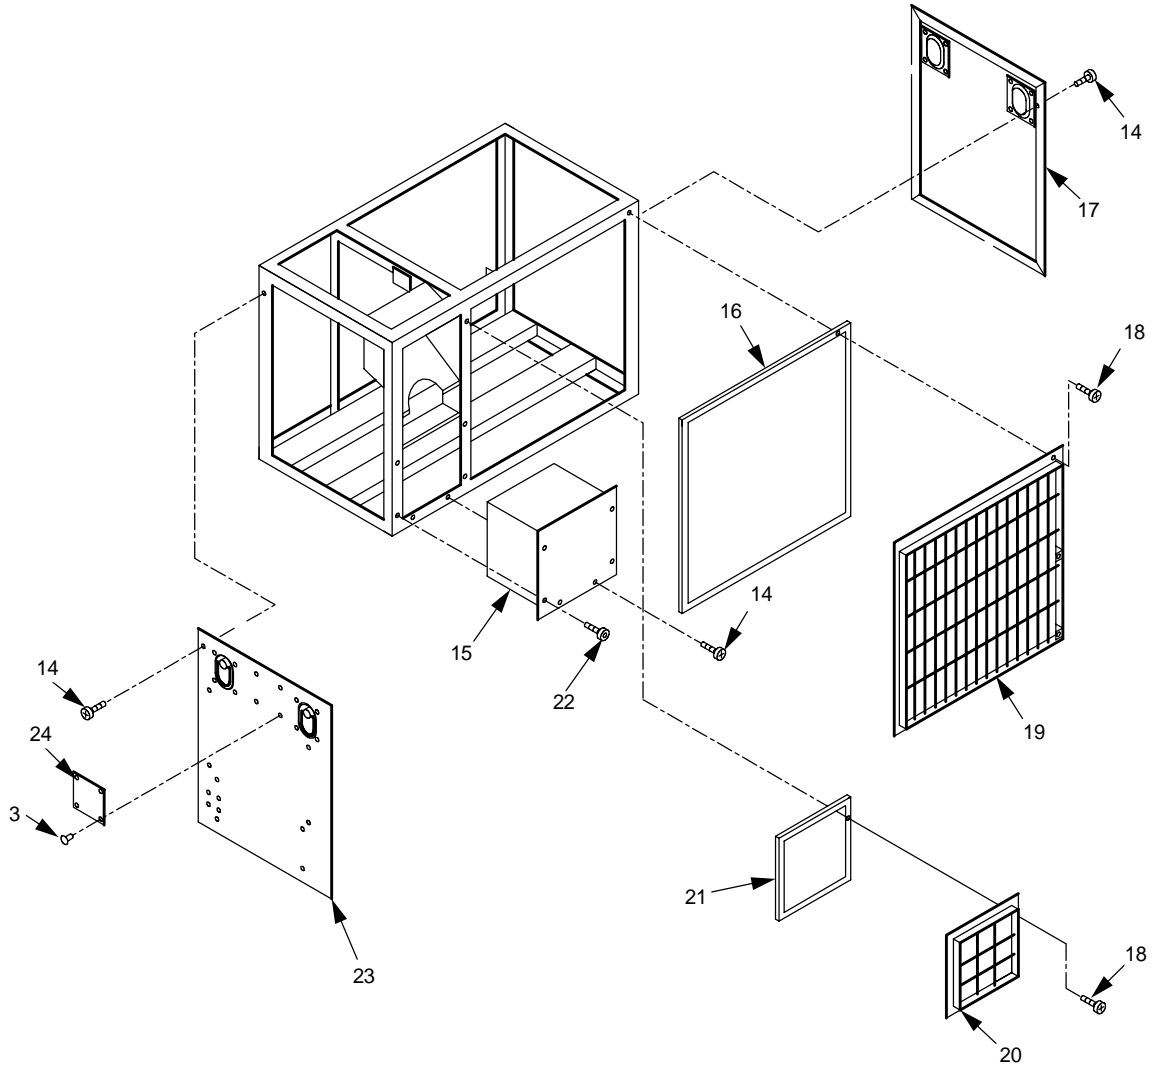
Condenser Assembly (Sheet 2 of 6)
